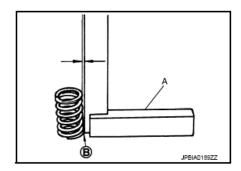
Checking Valve Spring Squareness Using Try Square Courtesy of NISSAN NORTH AMERICA, INC.
